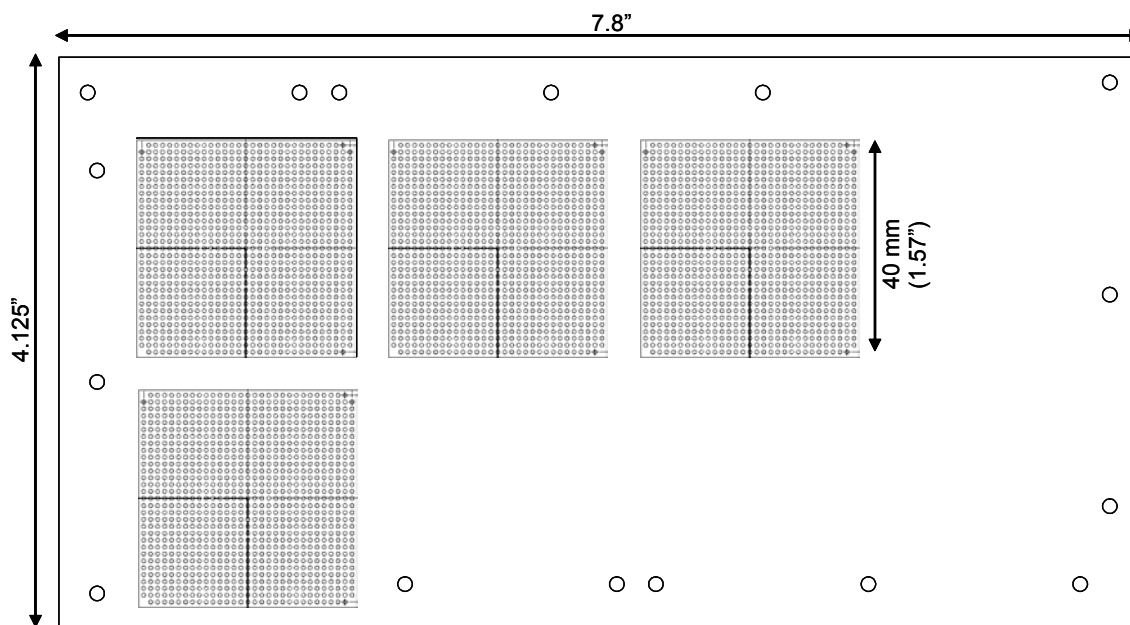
Drawing showing the footprints of four XC2V6000 chips on a DFEA daughterboard.
